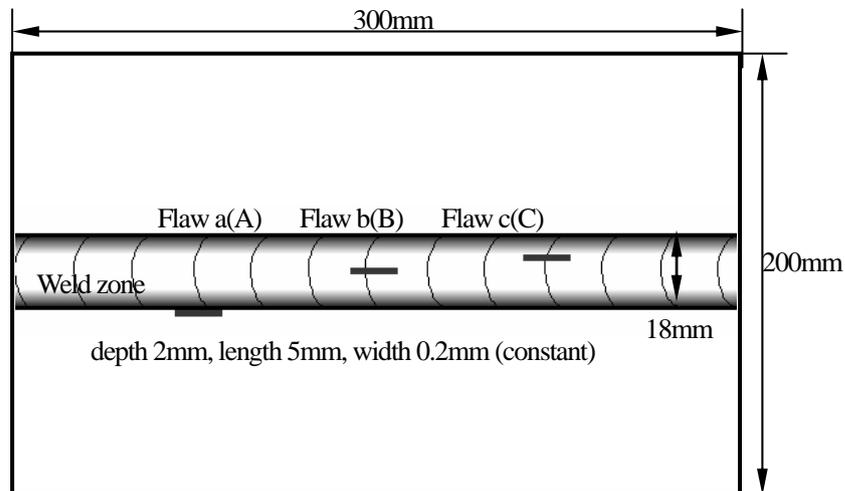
Surface flaw testing of the weld zone by the uniform eddy current probe.
